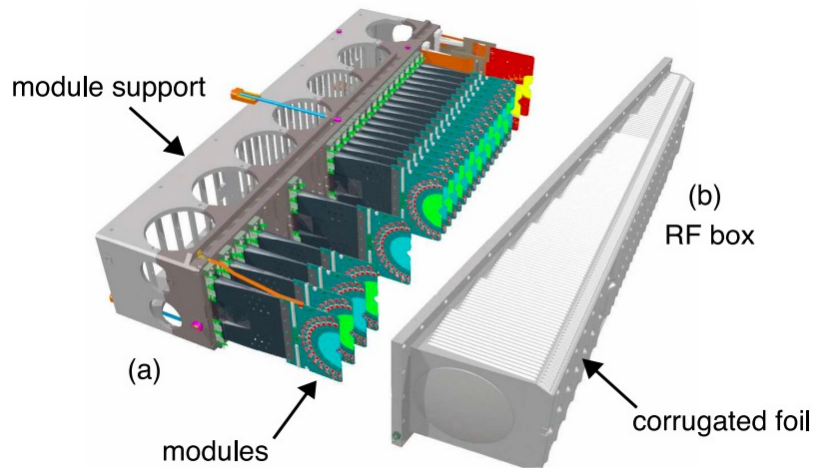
Exploded view of the VELO modules in their support structure and the RF box. Taken from Ref. [4].
